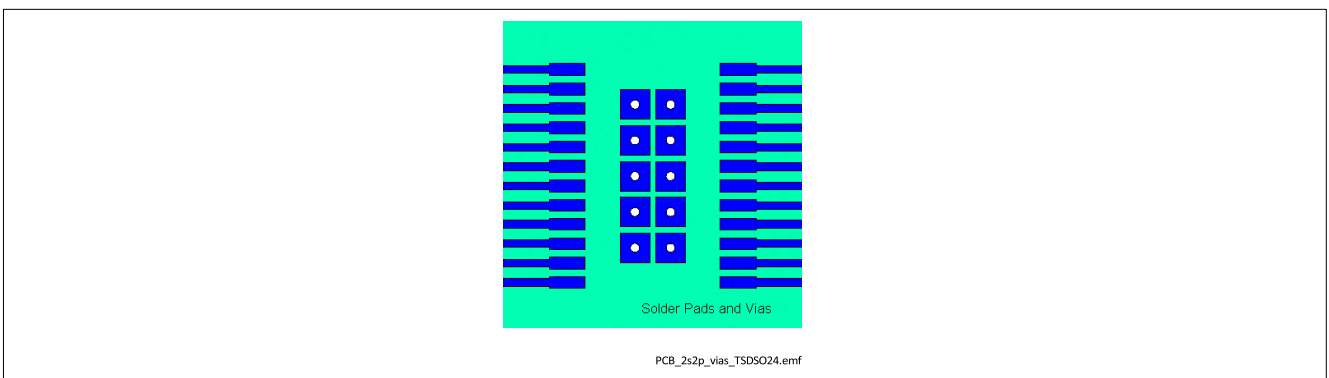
Thermal vias on PCB for 2s2p PCB setup
